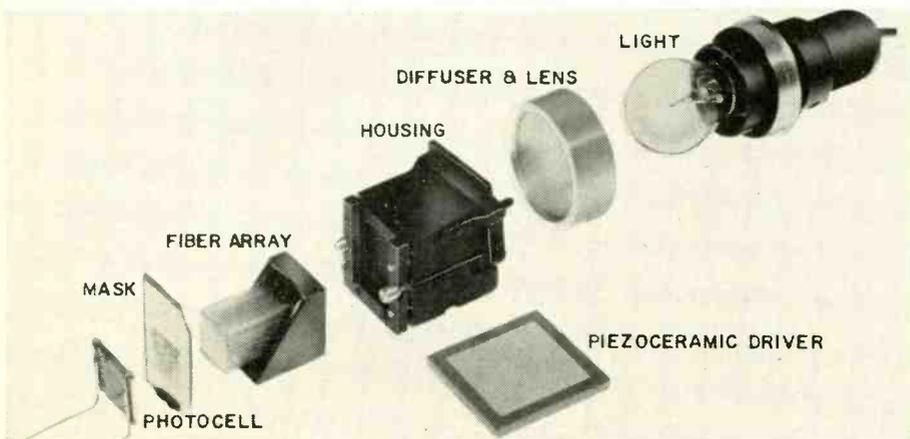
Complete Sceptron assembly. Driver unit would be placed under housing.
